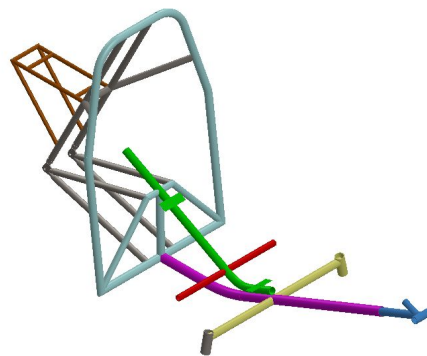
Isometric view of main frame: parcel rack (brown), rear forks (grey), seat support (green), main boom (pink), roll cage (light blue), handlebar connection tube (red), steering tube (yellow), and adjusting tube (blue)
